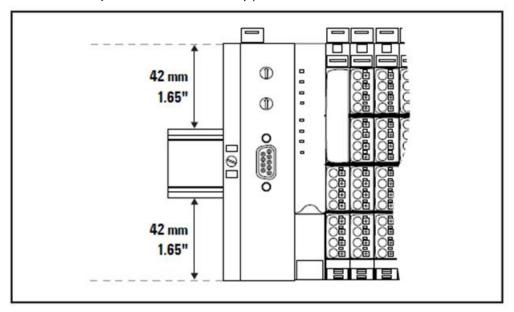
Installation Position of the RSTi-EP Station on the DIN Rail (Horizontal Installation)
